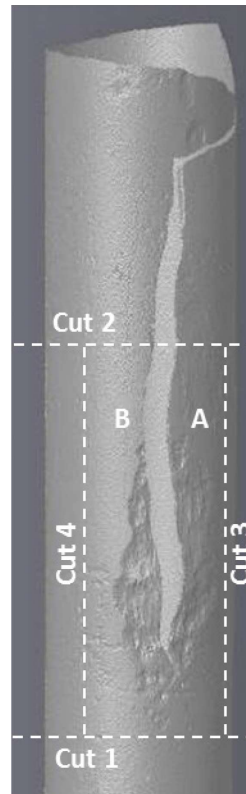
Schematic of the Cut Locations Selected for Fracture Surface Extraction
